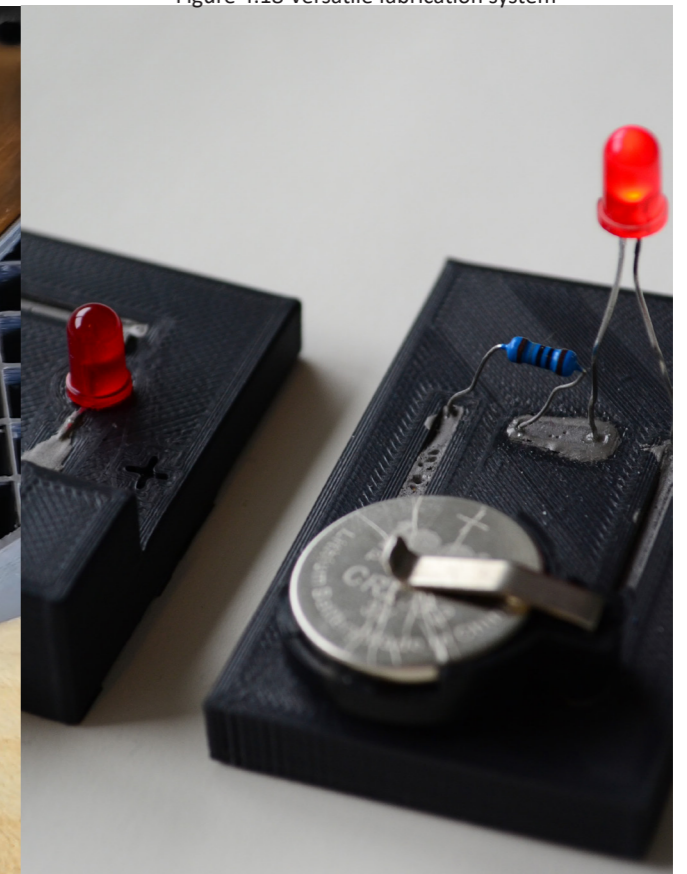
Integrated electronics using FDM and solder paste extrusion by Bon, M.
